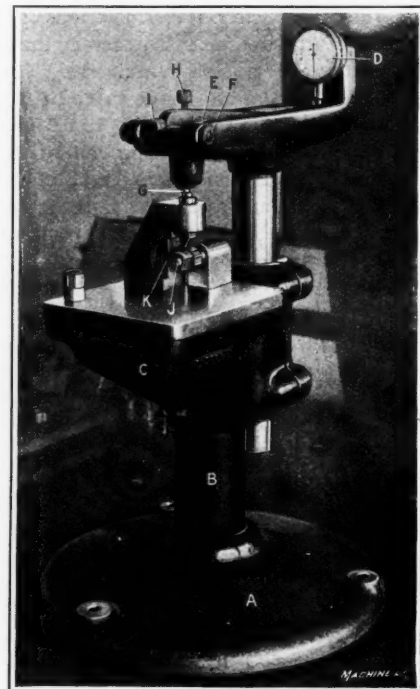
Special Type of Indicating Gage for inspecting Interrupter Cams for Electric Starter
